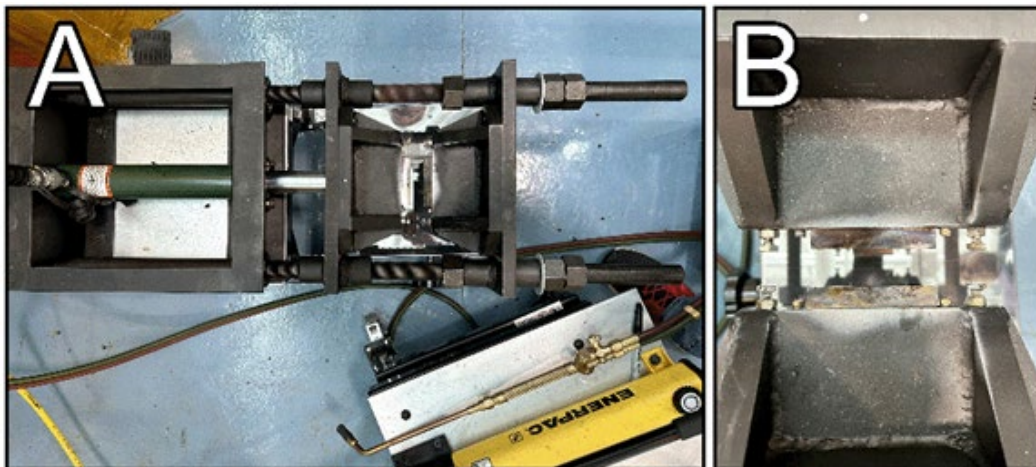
Stem crimping vise setup (A) and close-up of the crimping jaws (B)
